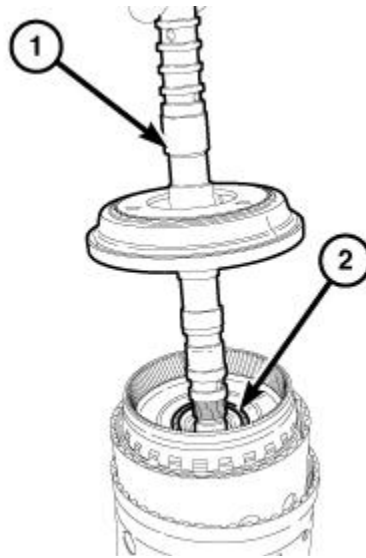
P2 Annulus/P3 Sun Gear & Drum Assembly
